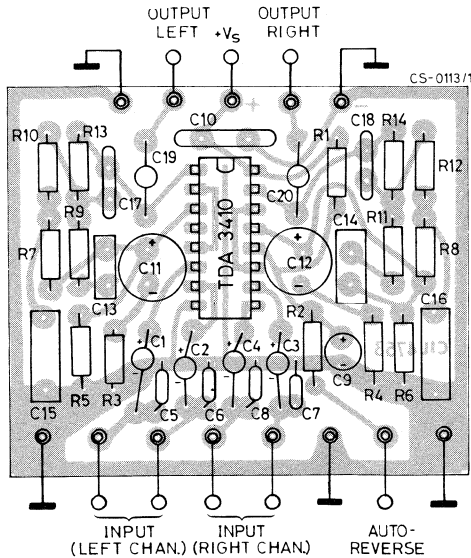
P.C. board and component lay-out (1:1 scale) for the circuit of fig. 6
